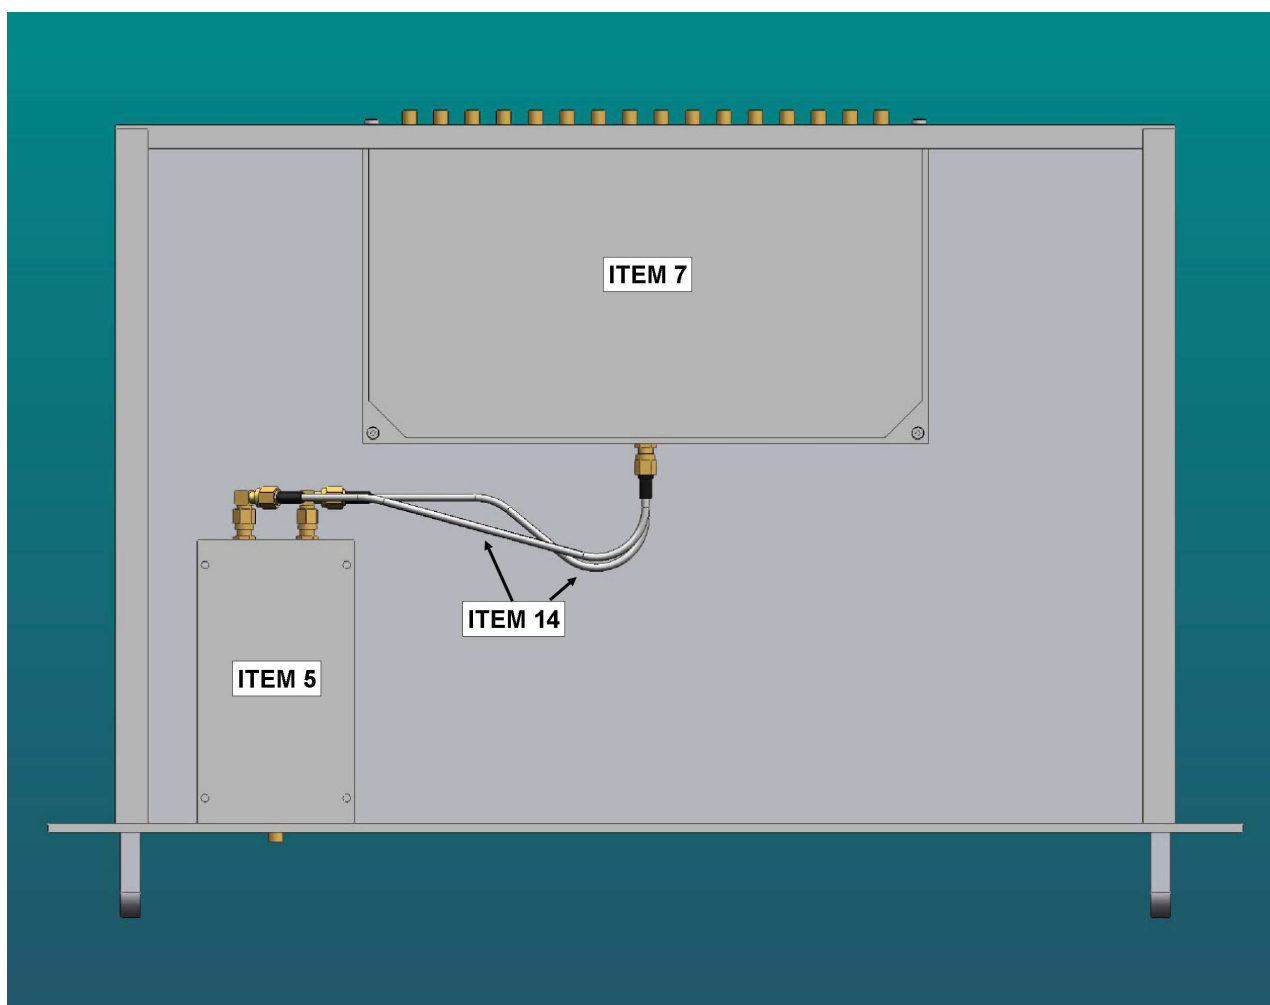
Fixed and variable LO: CDC sub-rack mechanical assembling (top view).
